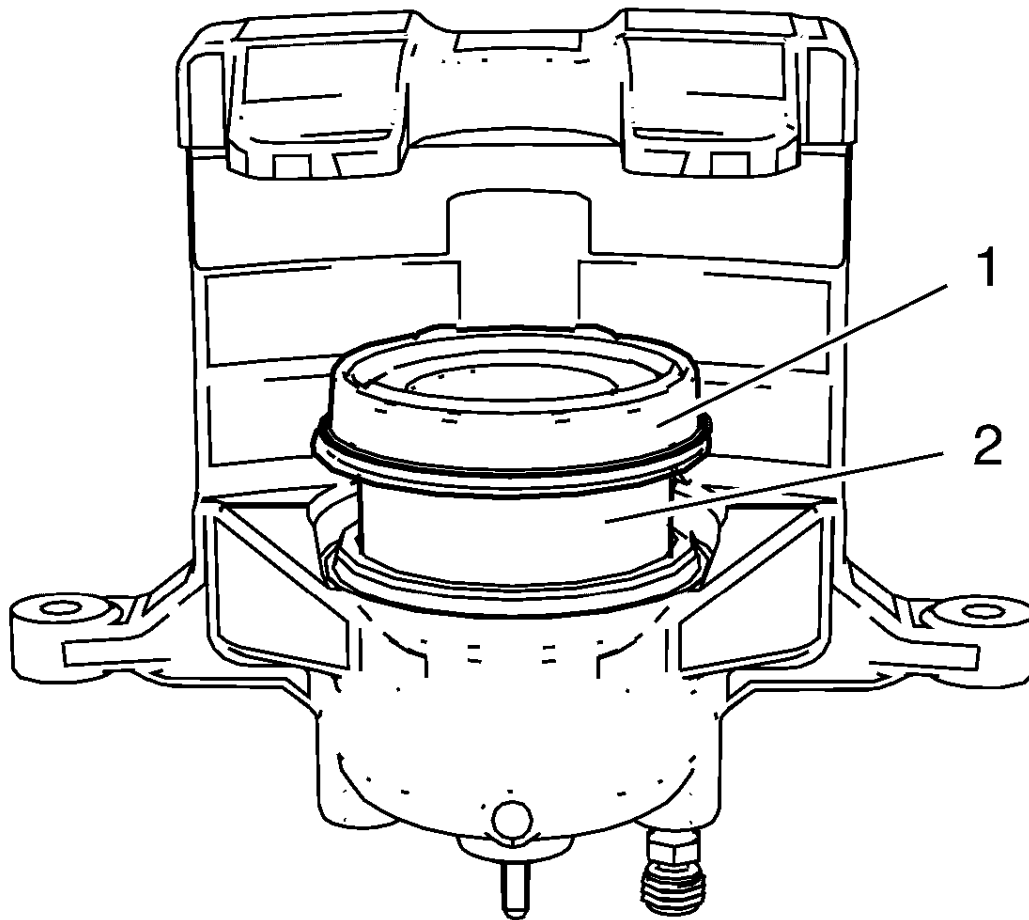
Caliper Piston And Caliper Piston Dust Boot Seal
